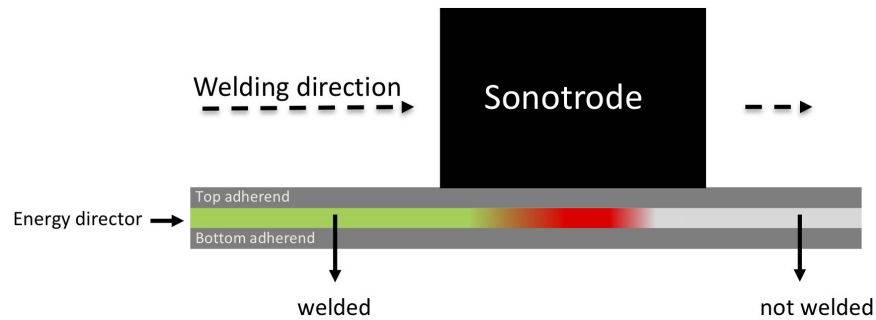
Schematic side view of weld interface during the continuous ultrasonic welding process. Not welded director shown ahead of the sonotrode, a hot area under the sonotrode, and a welded area behind the sonotrode.
